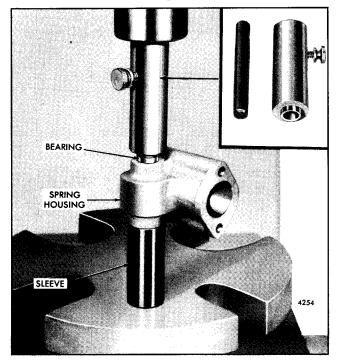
Installing Speed Control Shaft Bearing in Spring Housing using Tool J 9196
